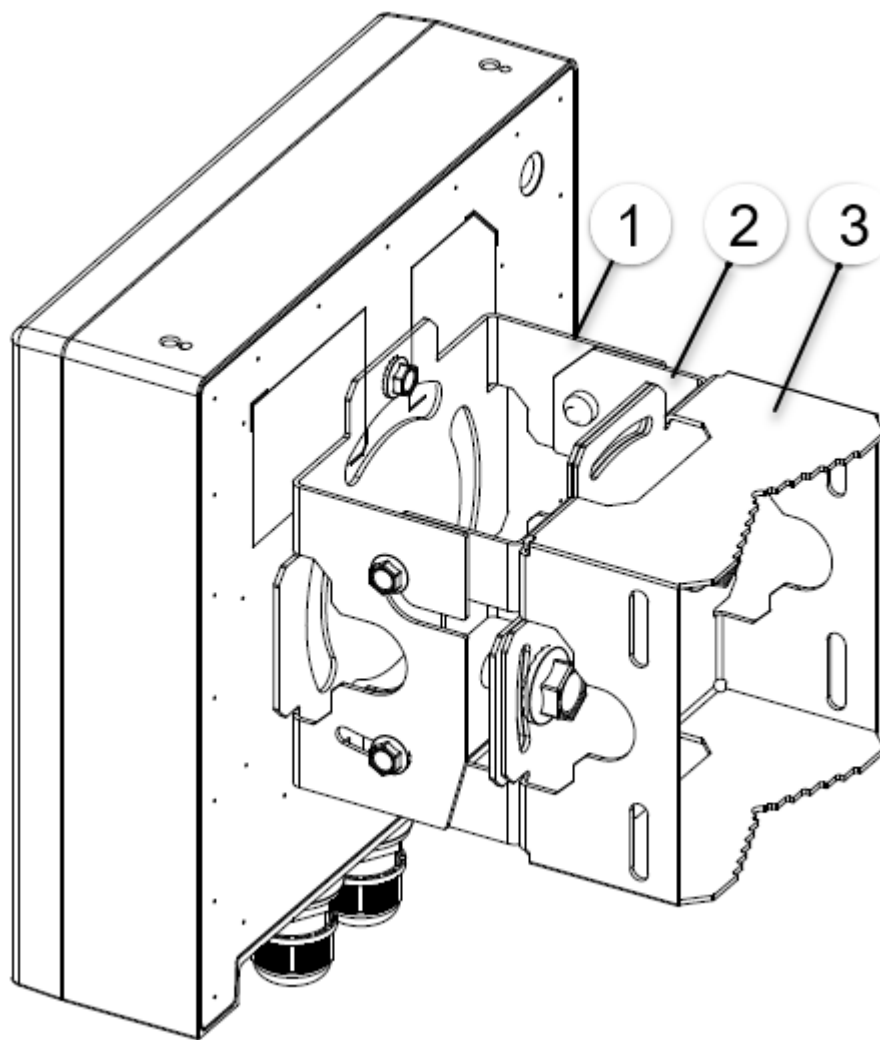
AP5050U access point with KT-147407-02 bracket parts
